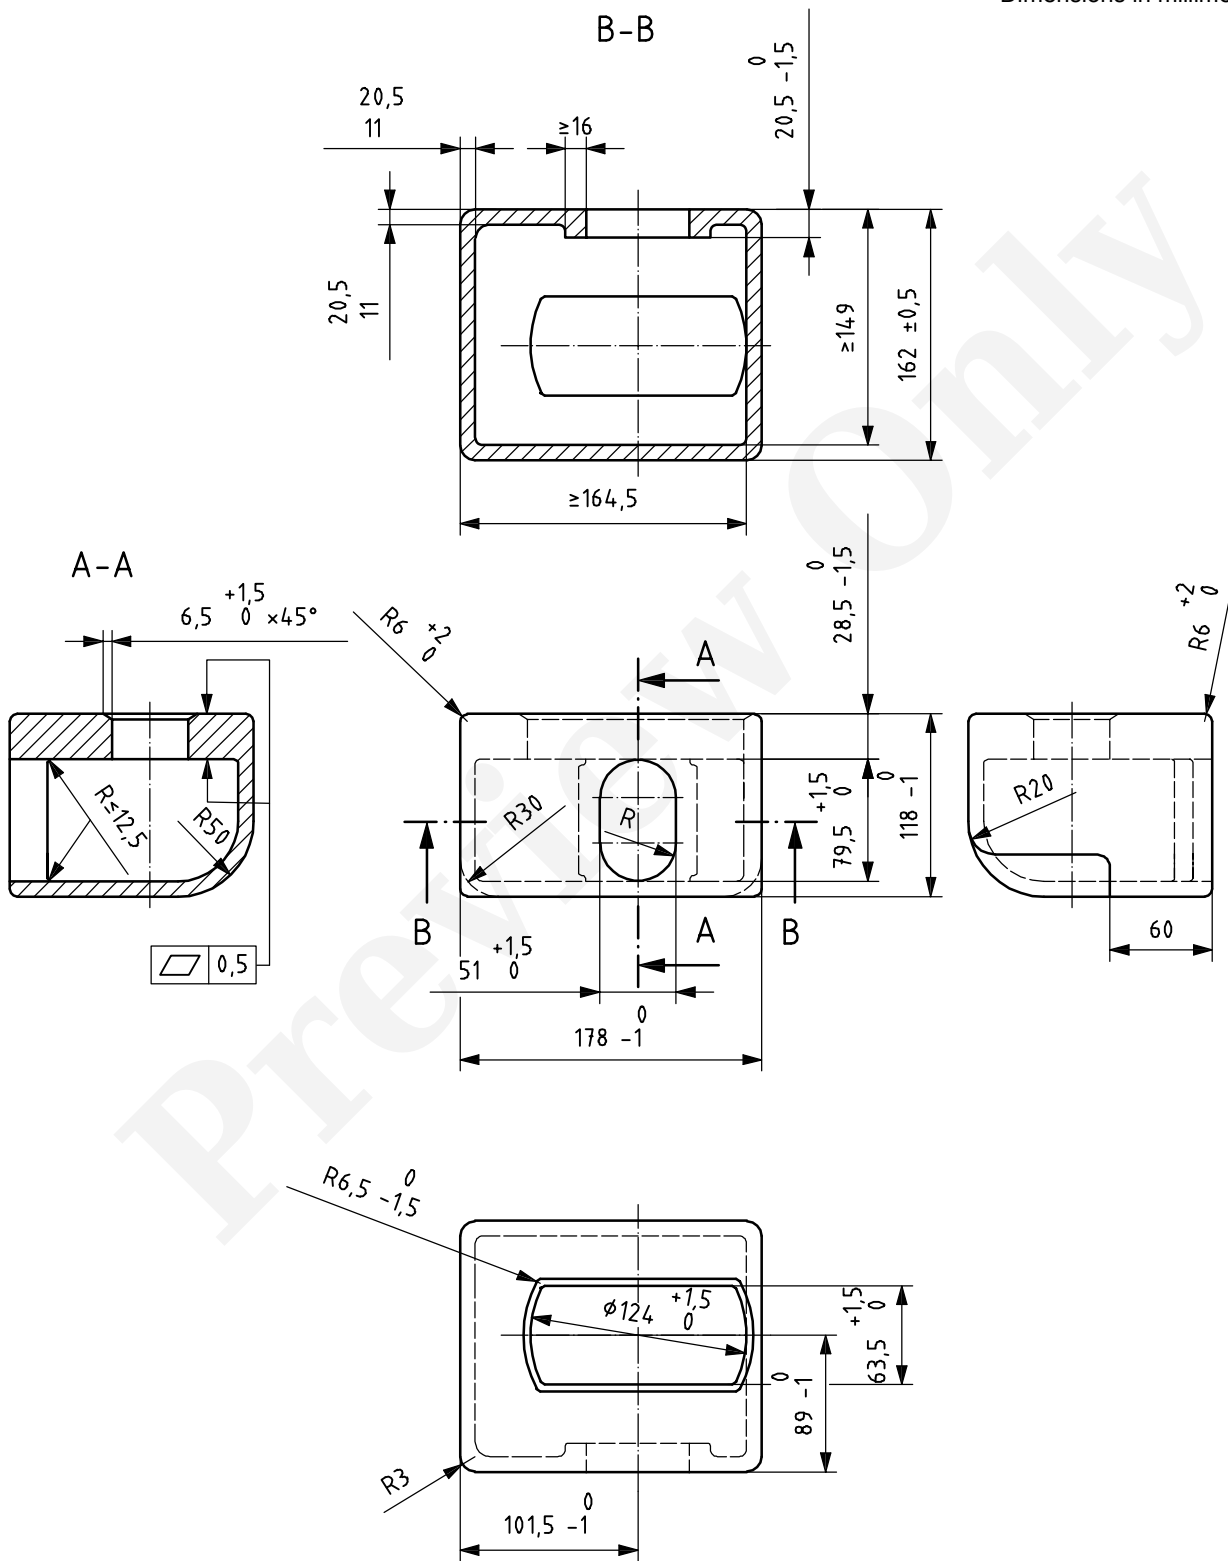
Top intermediate fitting — Dimensions in millimetres
